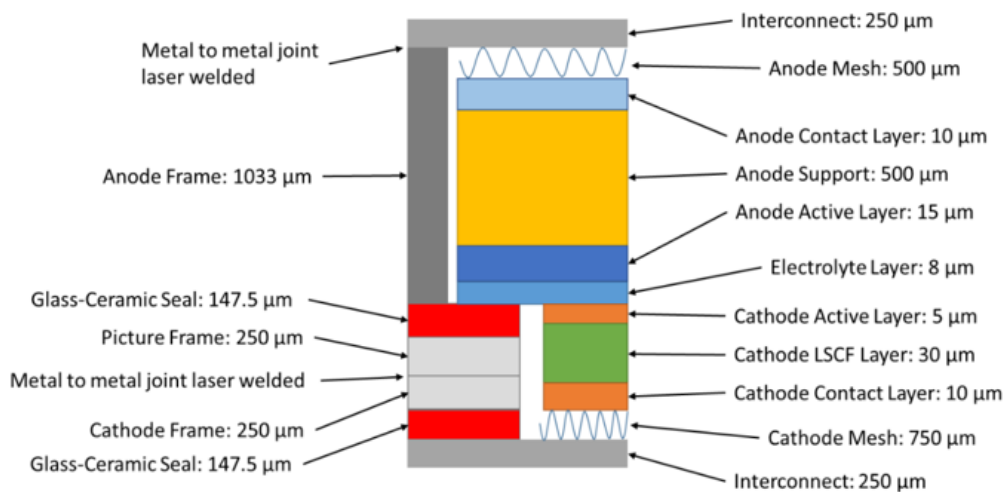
Detail Assembly and Specification of SOFC Cell
